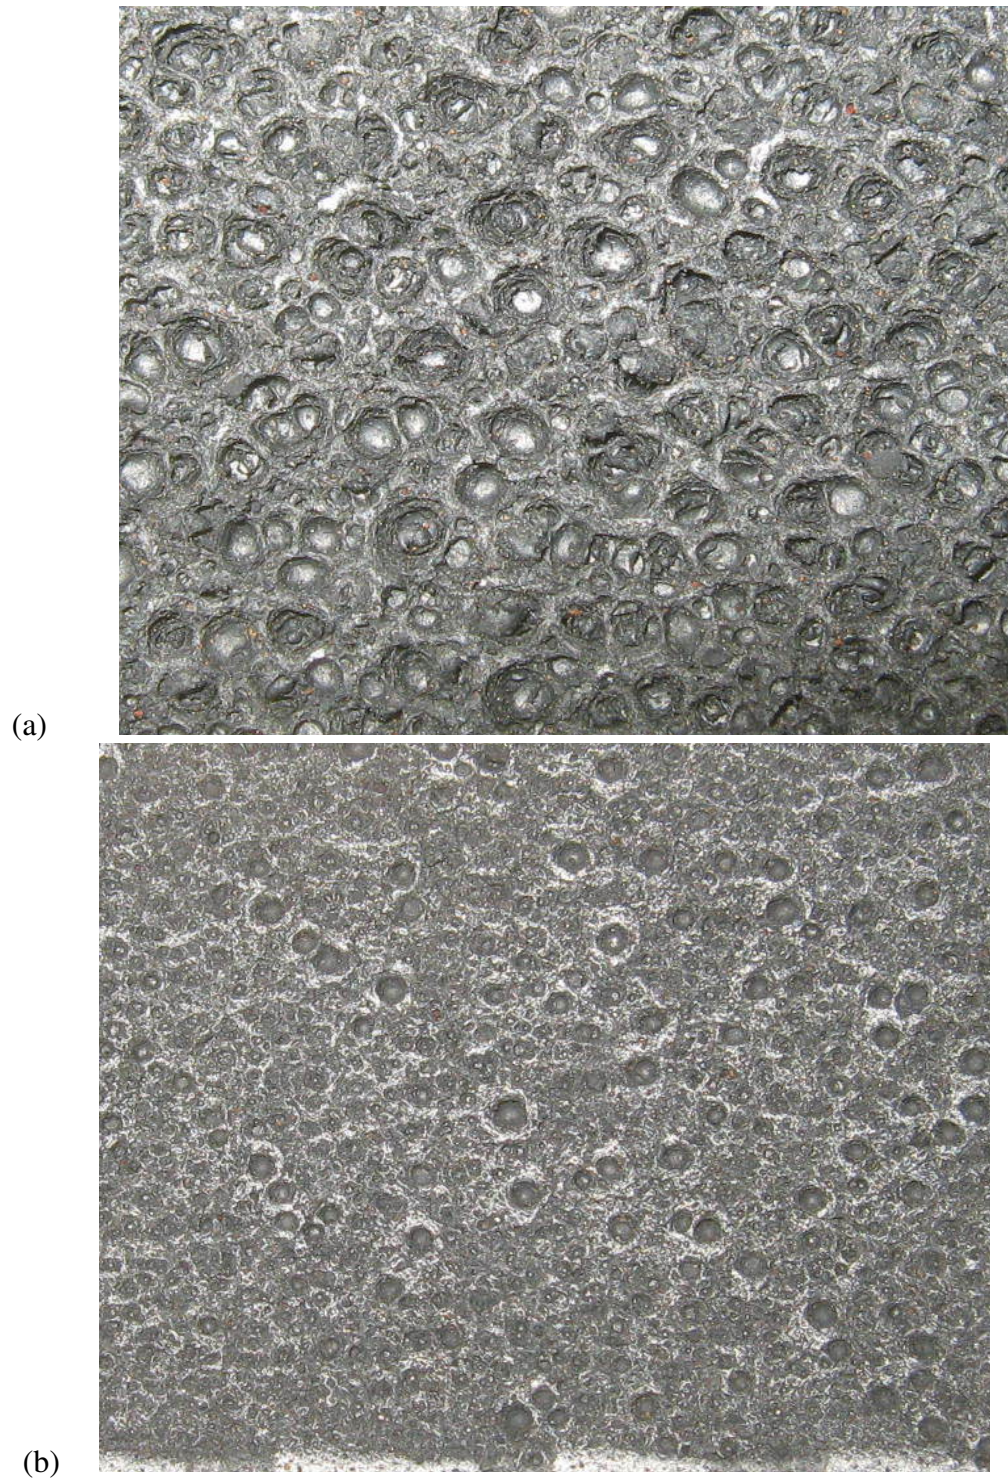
a) Fracture surface of a DCB specimen tested at 0.1 mm/min b) Fracture surface of a DCB specimen tested at 100 mm/min.
